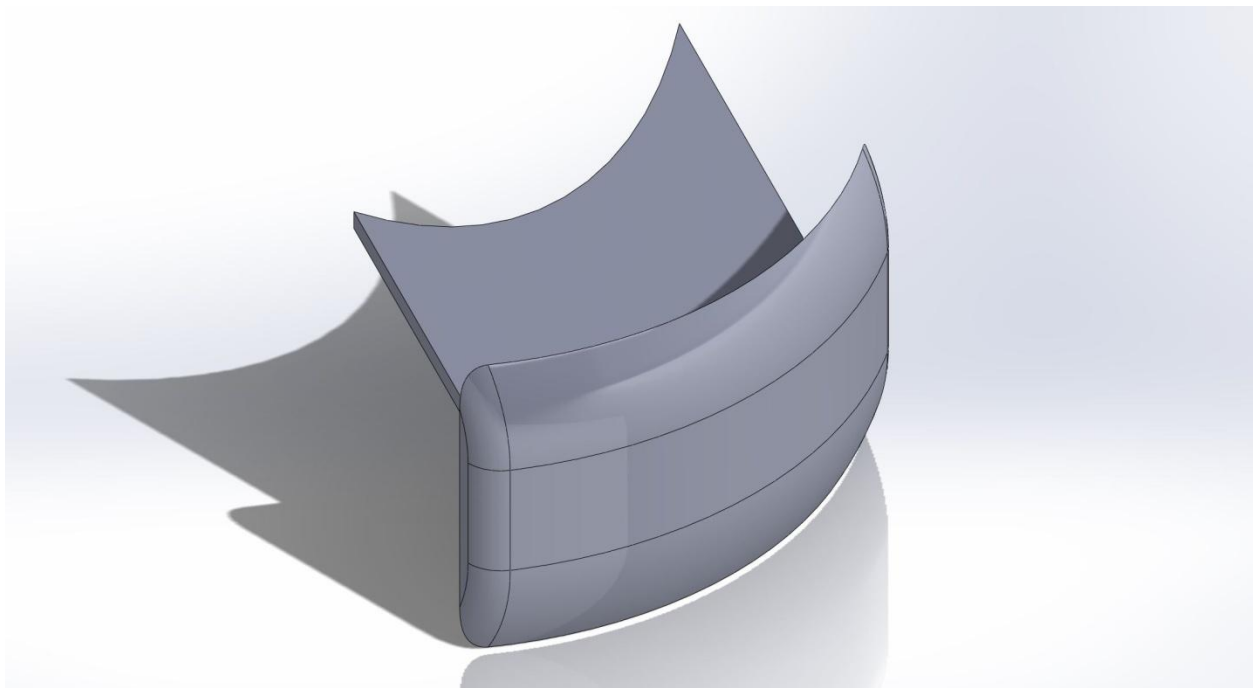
The front part of an airbrake. This fits directly onto the back half of the airbrake, with the main fin surfaces overlapping for gluing.
